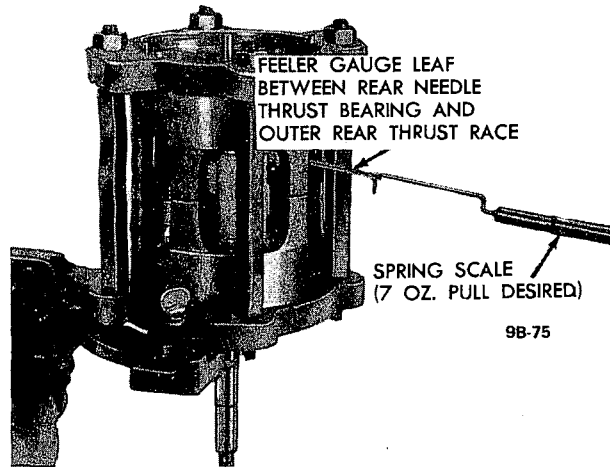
B-102 Checking Drag on Selected Feeler Gage Leaf with Spring Scale - 6 Cylinder Compressor
